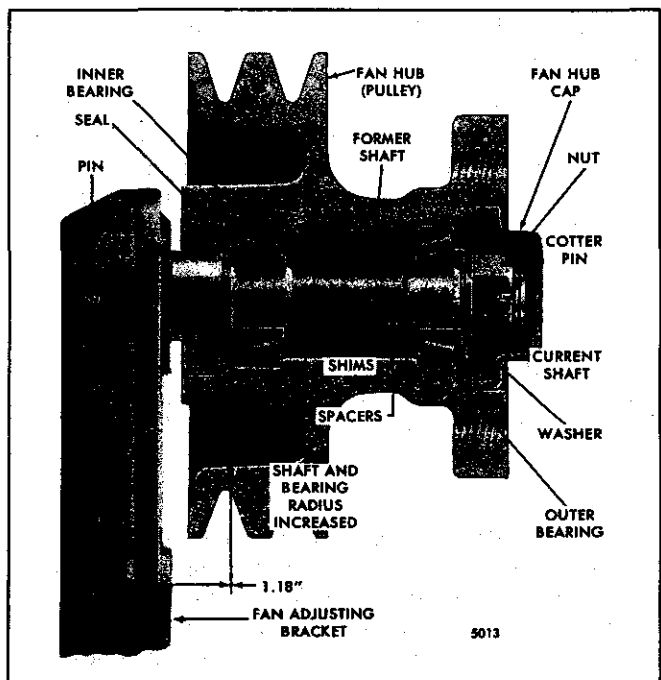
Shaft Type Fan Hub Assembly (6V Engines)
